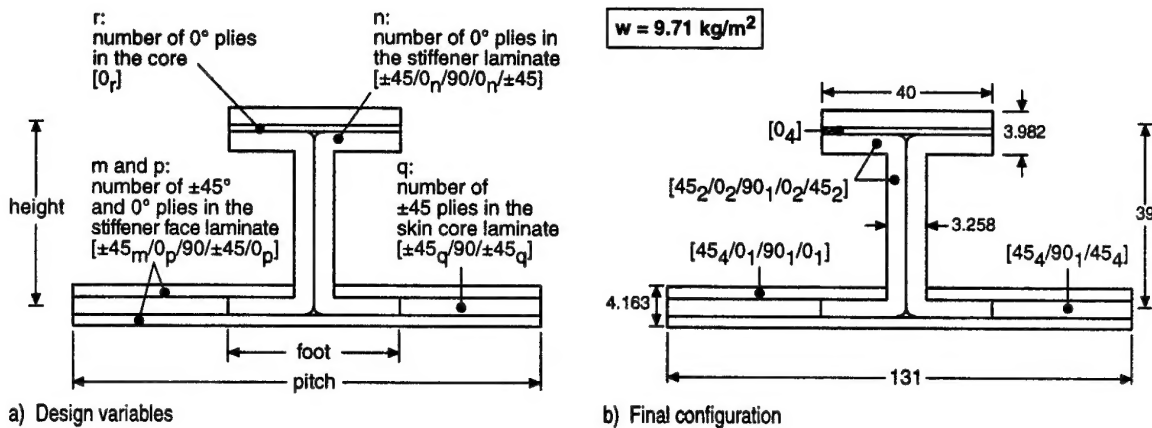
I-stiffened, flush-skin design (dimensions in mm)
